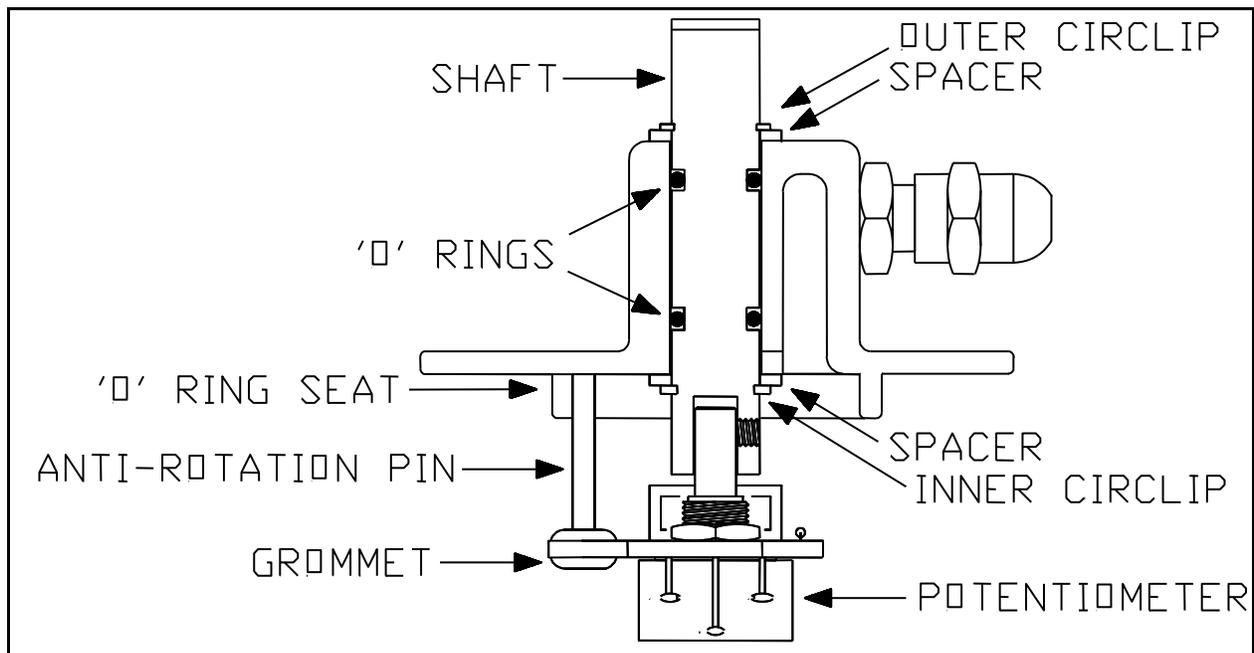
MEDIUM DUTY RUDDER FOLLOWER LID ASSEMBLY
